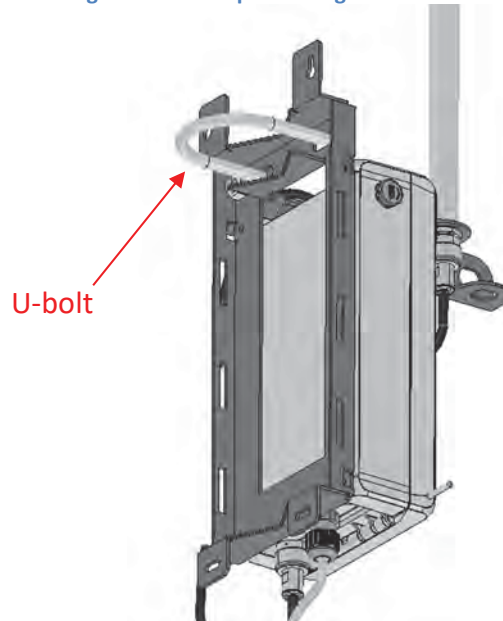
Compact casing - rear view of the pole mounting using U-bolt (no pole represented)
